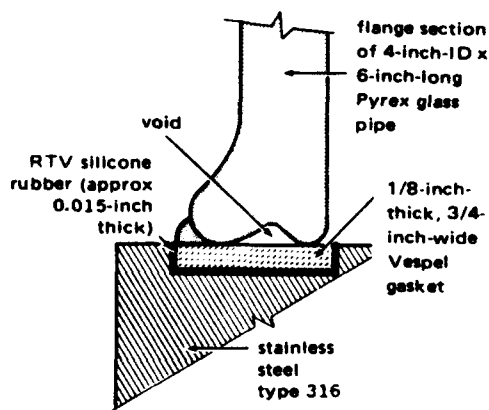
Experimental sealing and bearing system utilizing a Vespel washer between the glass pipe end flange and the metal end-closure plate.
